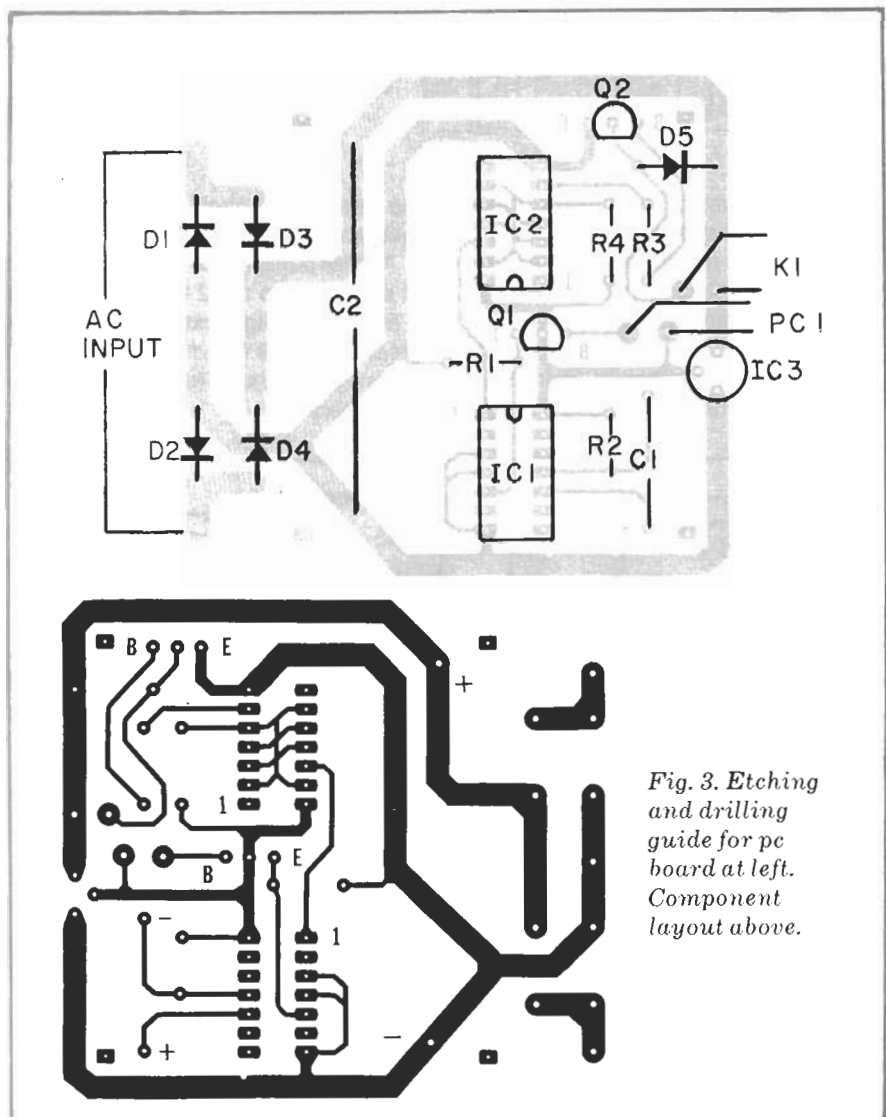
Etching and drilling guide for pc board at left. Component layout above.
